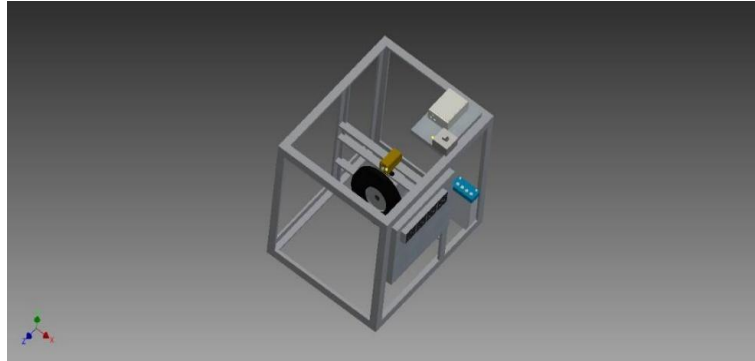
CAD Representation Of The Selected Flywheel-Generator Enclosure And Component Arrangement.
